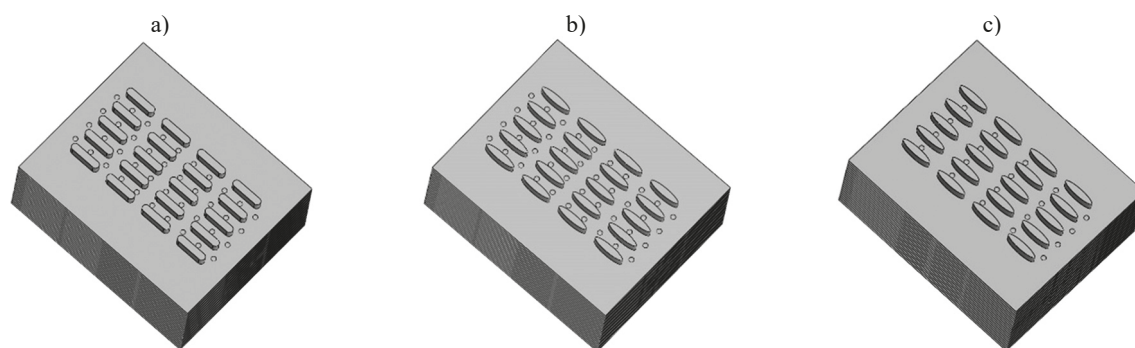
Layout schemes for dimples on the fins of profiled surfaces
